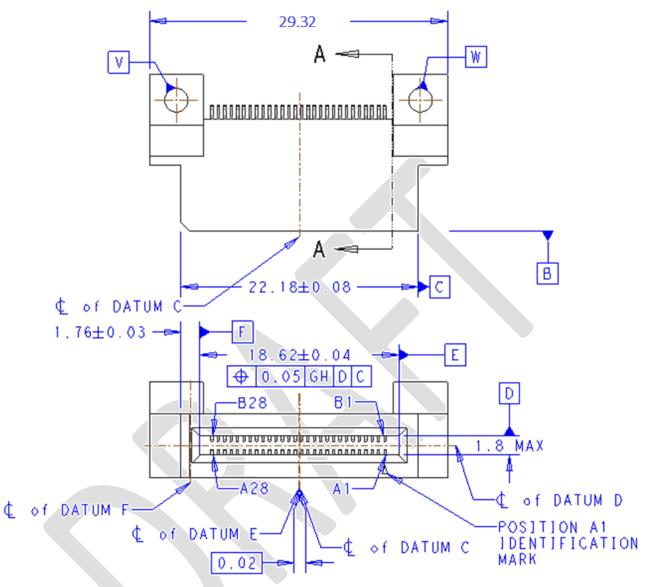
1C STRADDLE MOUNT CONNECTOR DIMENSIONS – FRONT VIEW (MM)
